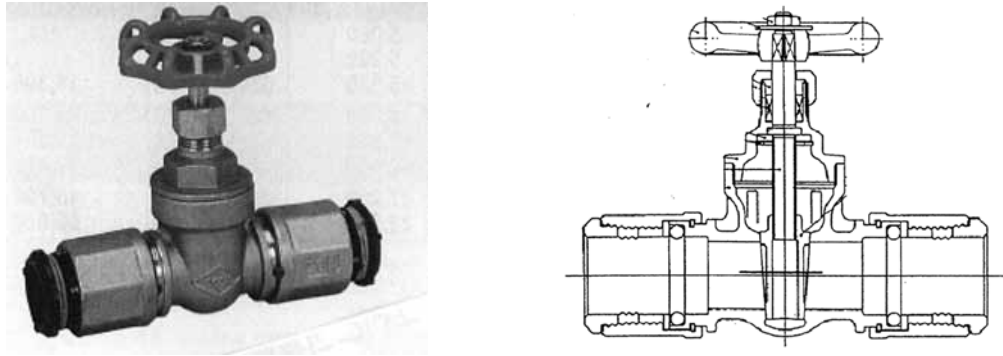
Mechanical type (valve developed for thin stainless steel pipes where pipe screws cannot be used)³
